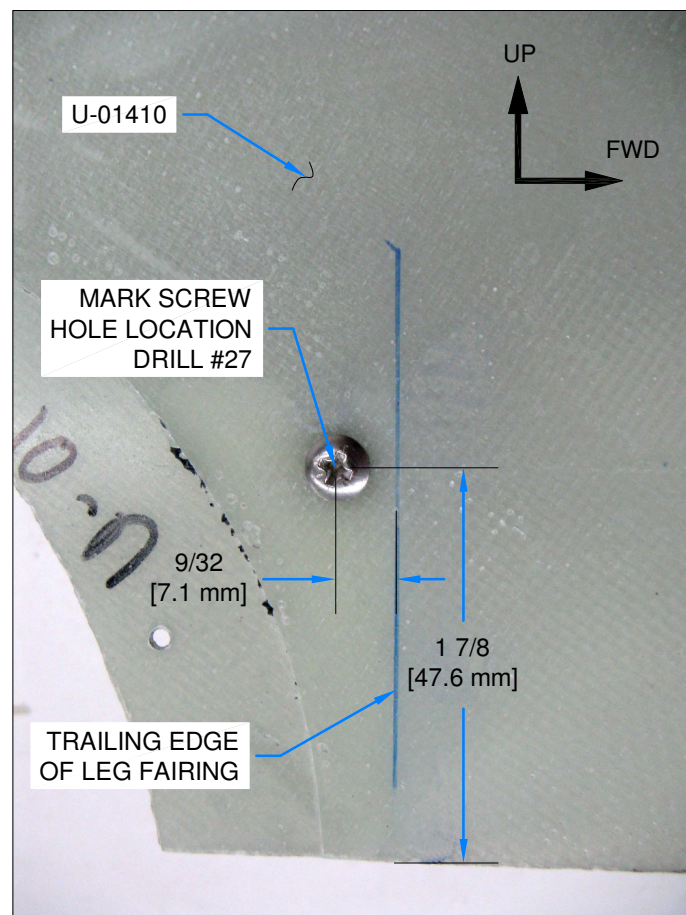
SCREW LOCATION INBOARD SIDE OF UPPER INTERSECTION FAIRING
